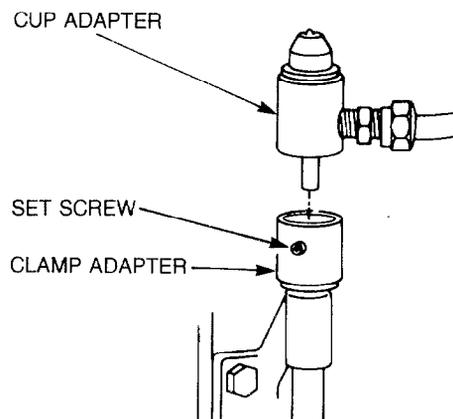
Cup Adapter to Clamp Adapter — Installation
